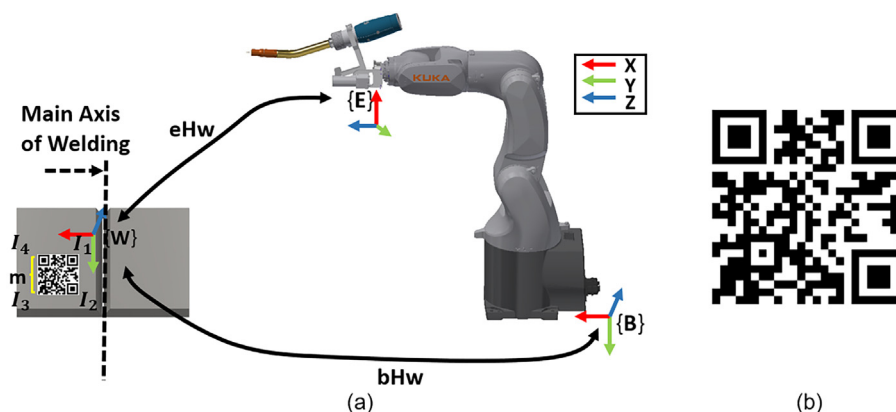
(a) Fiducial QR code marker placed in the weld joint to reveal the pose of the welding specimen, (b) QR code used as fiducial marker.
